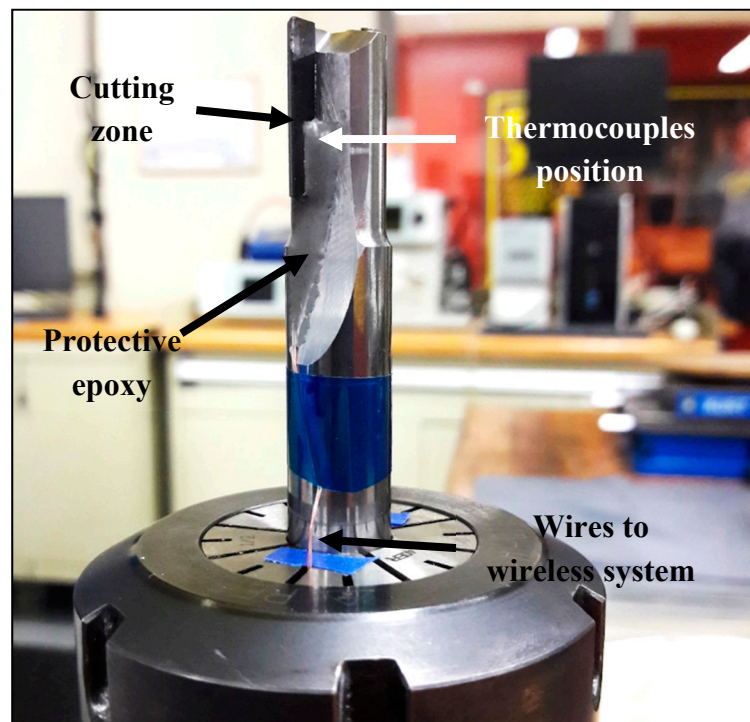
Thermocouples equipped polycrystalline diamond (PCD) tool.
